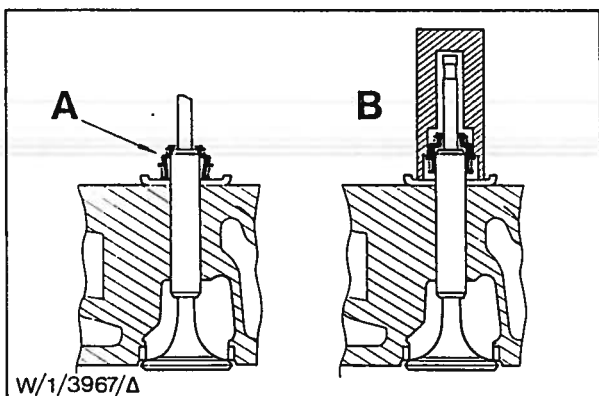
Fitting Inlet Valve Stem Seals on Naturally Aspirated Engines
